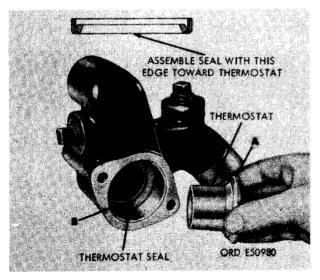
REMOVING OR INSTALLING THERMOSTAT AND THERMOSTAT SEAL.
